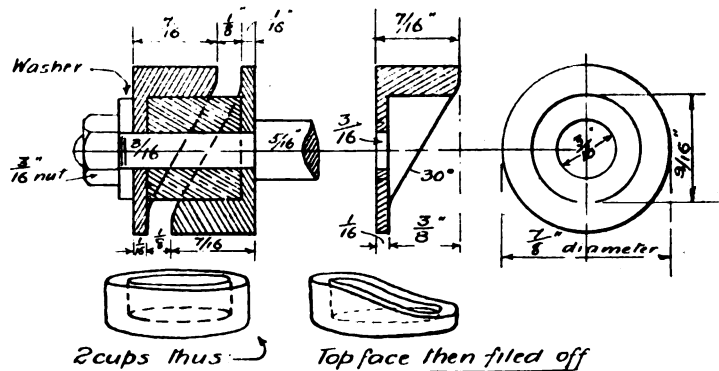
SIMPLE METHOD OF MAKING THE CAM.
